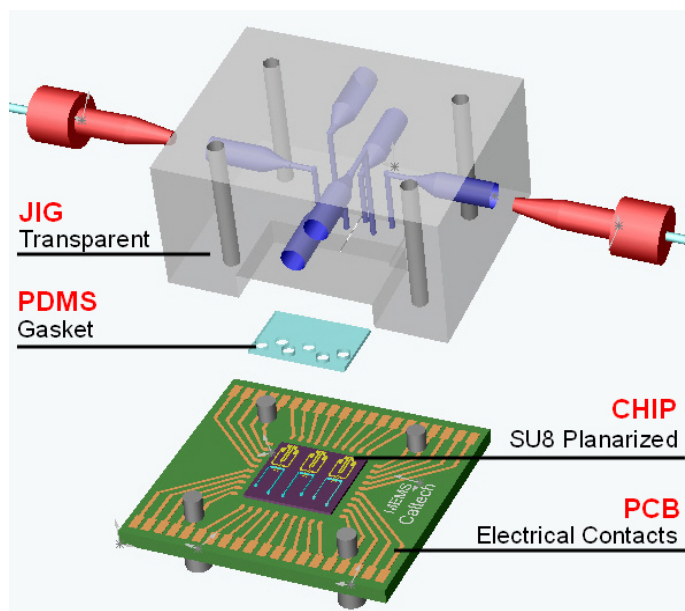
Chip assembly with jig and PCB for platinum black electroplated impedance sensor device I
